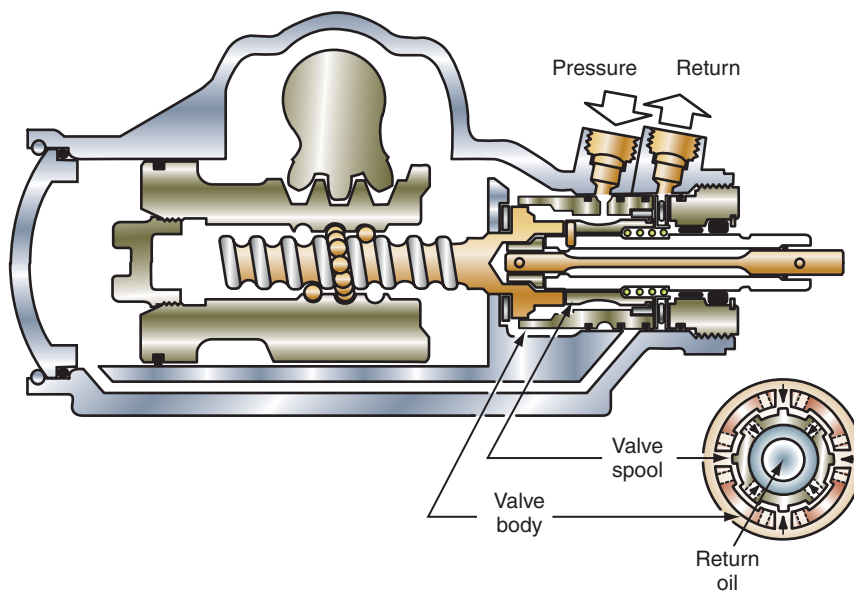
Power steering gear fluid flow with the wheels straight ahead.
